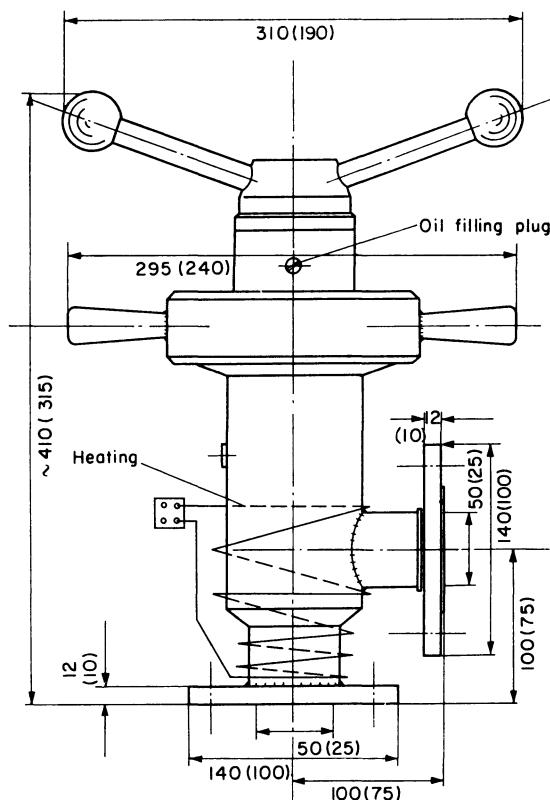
Dimensions of ultra-high vacuum valves supplied by Heraeus⁵⁴²
